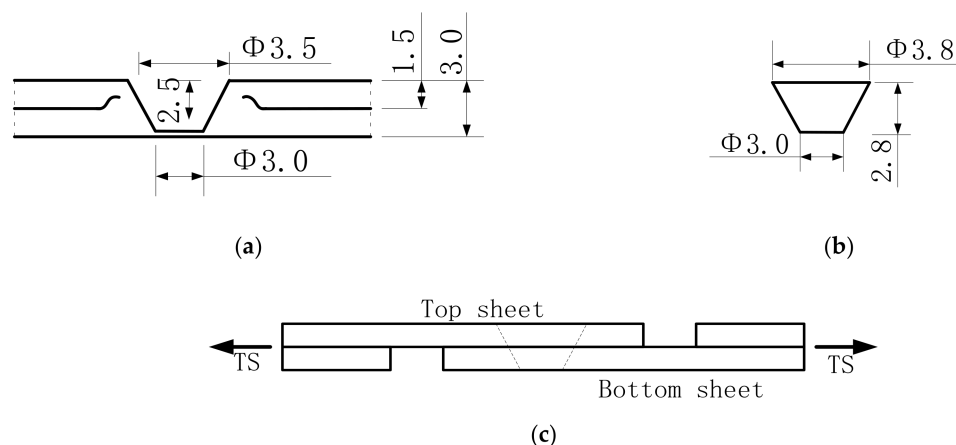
The dimension of keyhole and plug (unit: mm). (a) keyhole; (b) plug; (c) the specimens for tensile-shear (TS) test.
